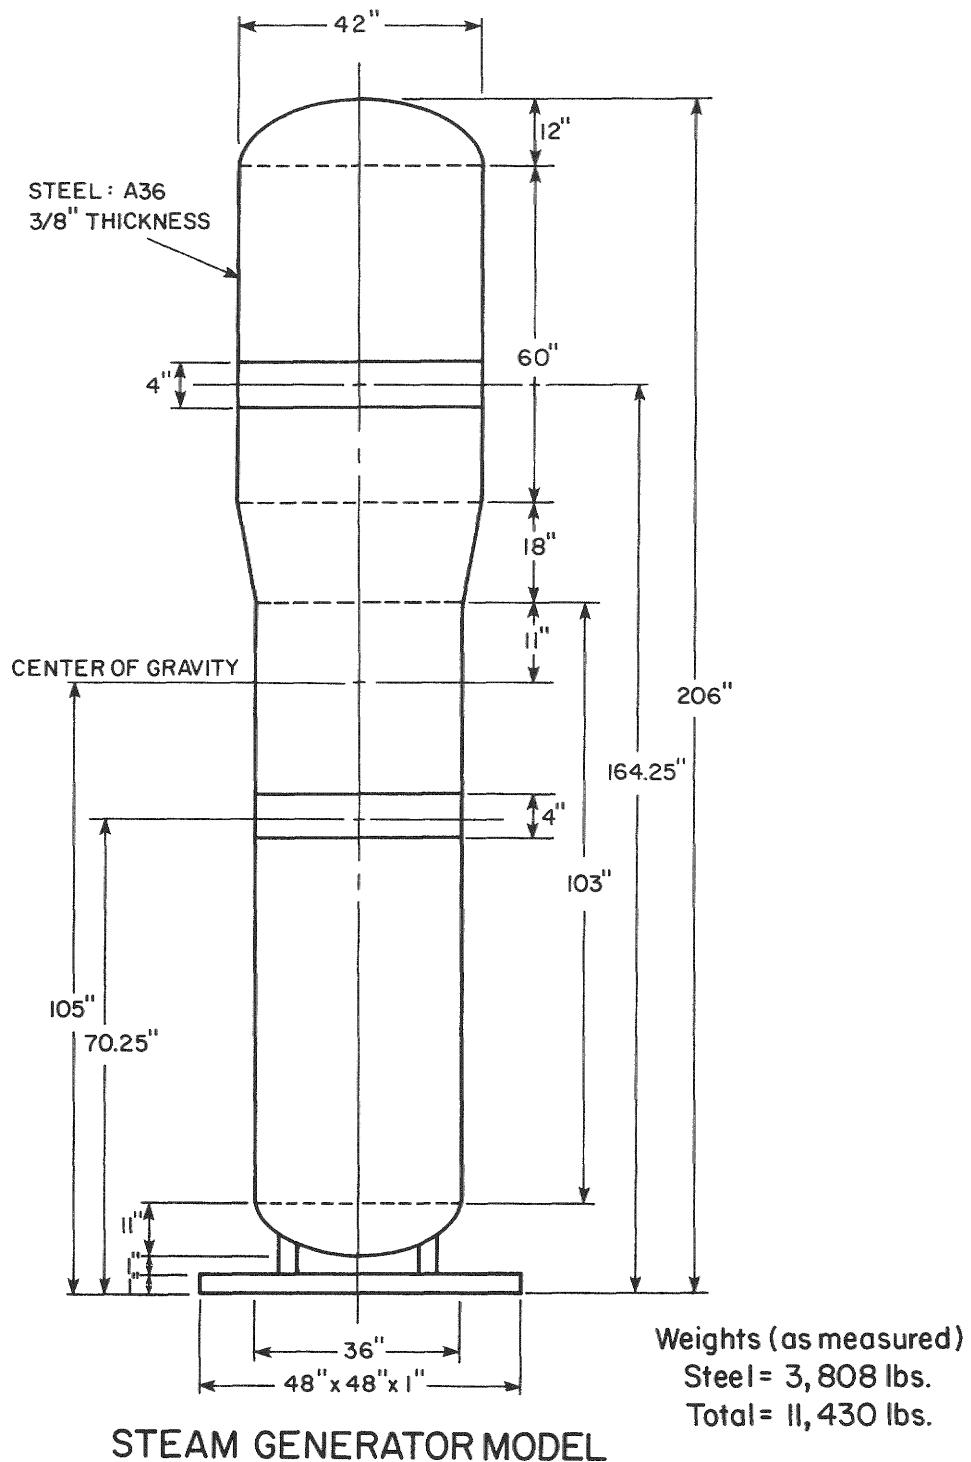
SCHEMATIC DRAWING OF THE STEAM GENERATOR MODEL
